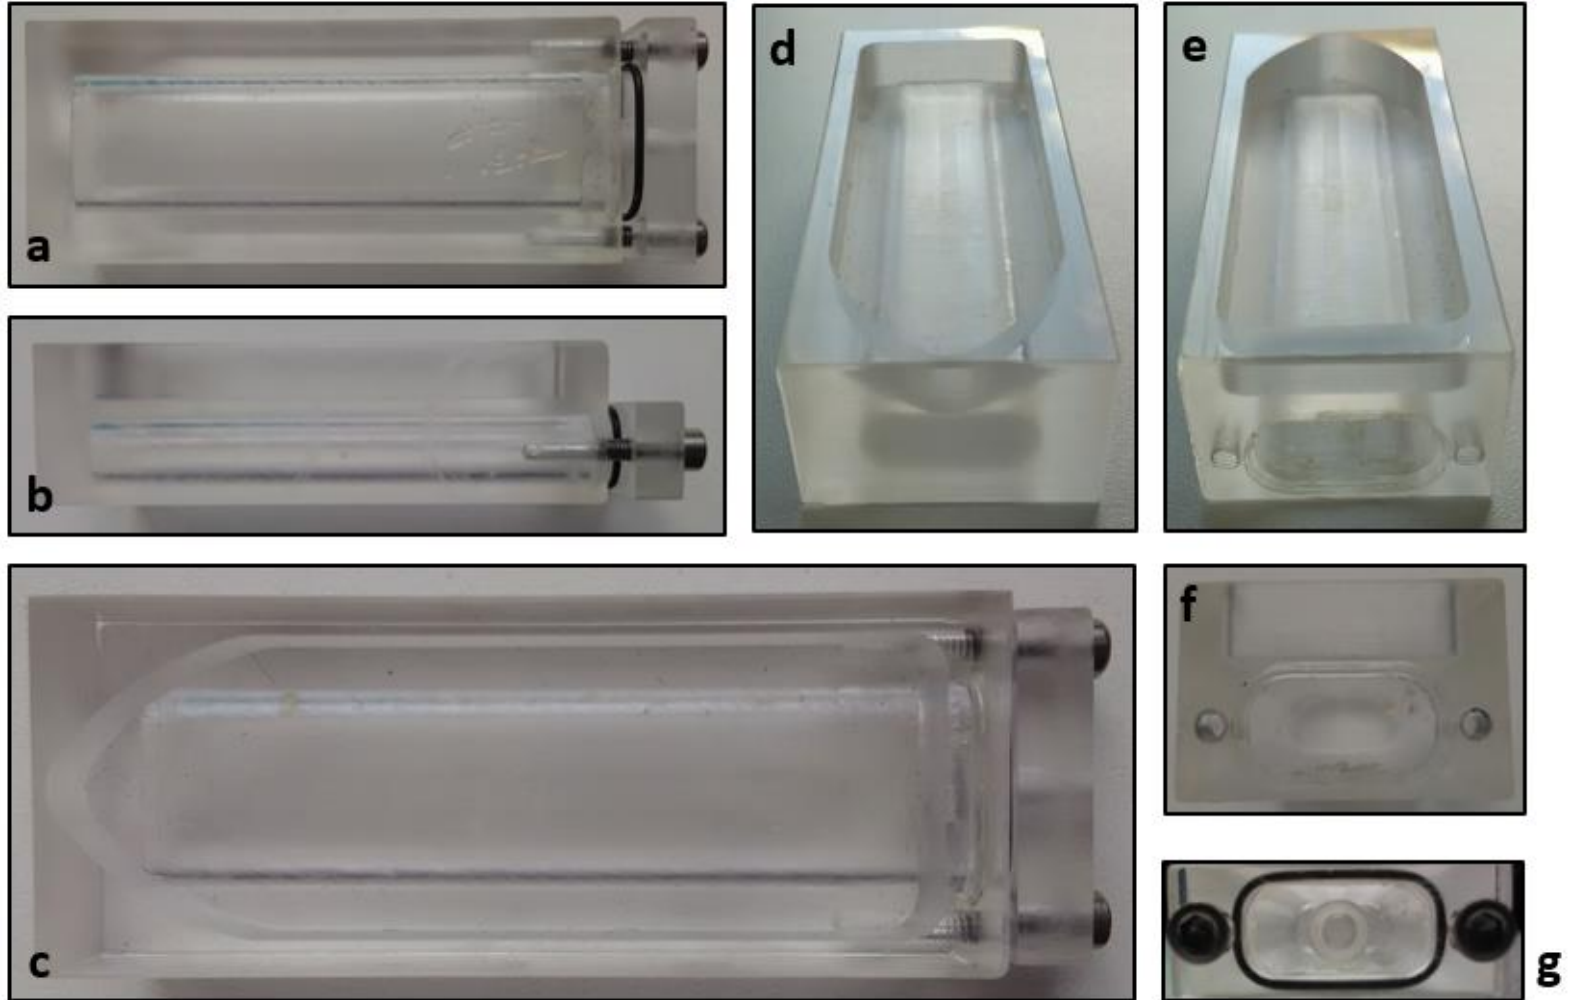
Housing for the Daily Diary (DD) IMU (see also Fig. S5.8): (a) Bottom view with plug and screws in place (not fully closed). O-ring used to seal the housing also observable (see Fig. 8). (b) Side view. (c) Top view highlighting groove for Fastloc-GPS device to sit in (see later). (d) Front view. (e) Rear view. Note the slight groove in the entrance to the cavity for the o-ring to sit. (f) View of opening at rear of tag highlighting two 2 mm holes for screw. (g) View of plug in rear of tag with screws and o-ring seal in place. No pressure sensor is fitted here (refer to Fig. S5.8). Dimensions in text.
